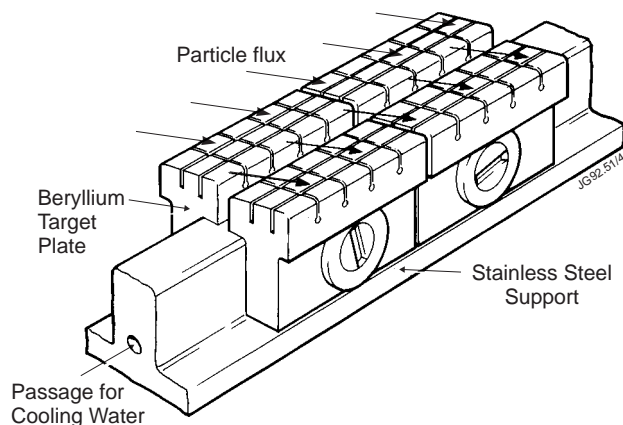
Three dimensional view of the MK1 target plate tiles clamped on a water cooled rode.
